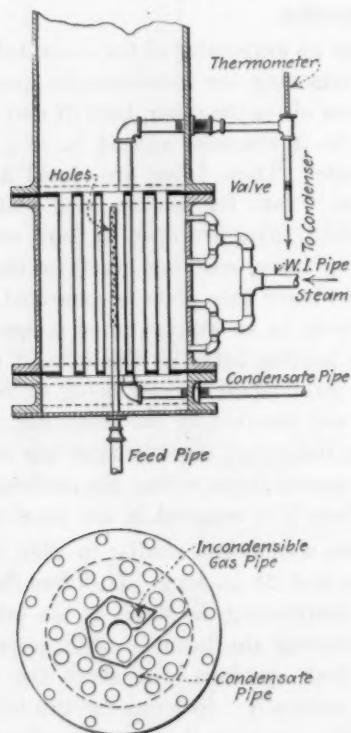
30 COPPER HEATING TUBES  $1\frac{3}{4}$  IN. BY 24 IN. BY 18 BIRMINGHAM WIRE GAGE. TOTAL HEATING SURFACE 29 Sq. Ft.
